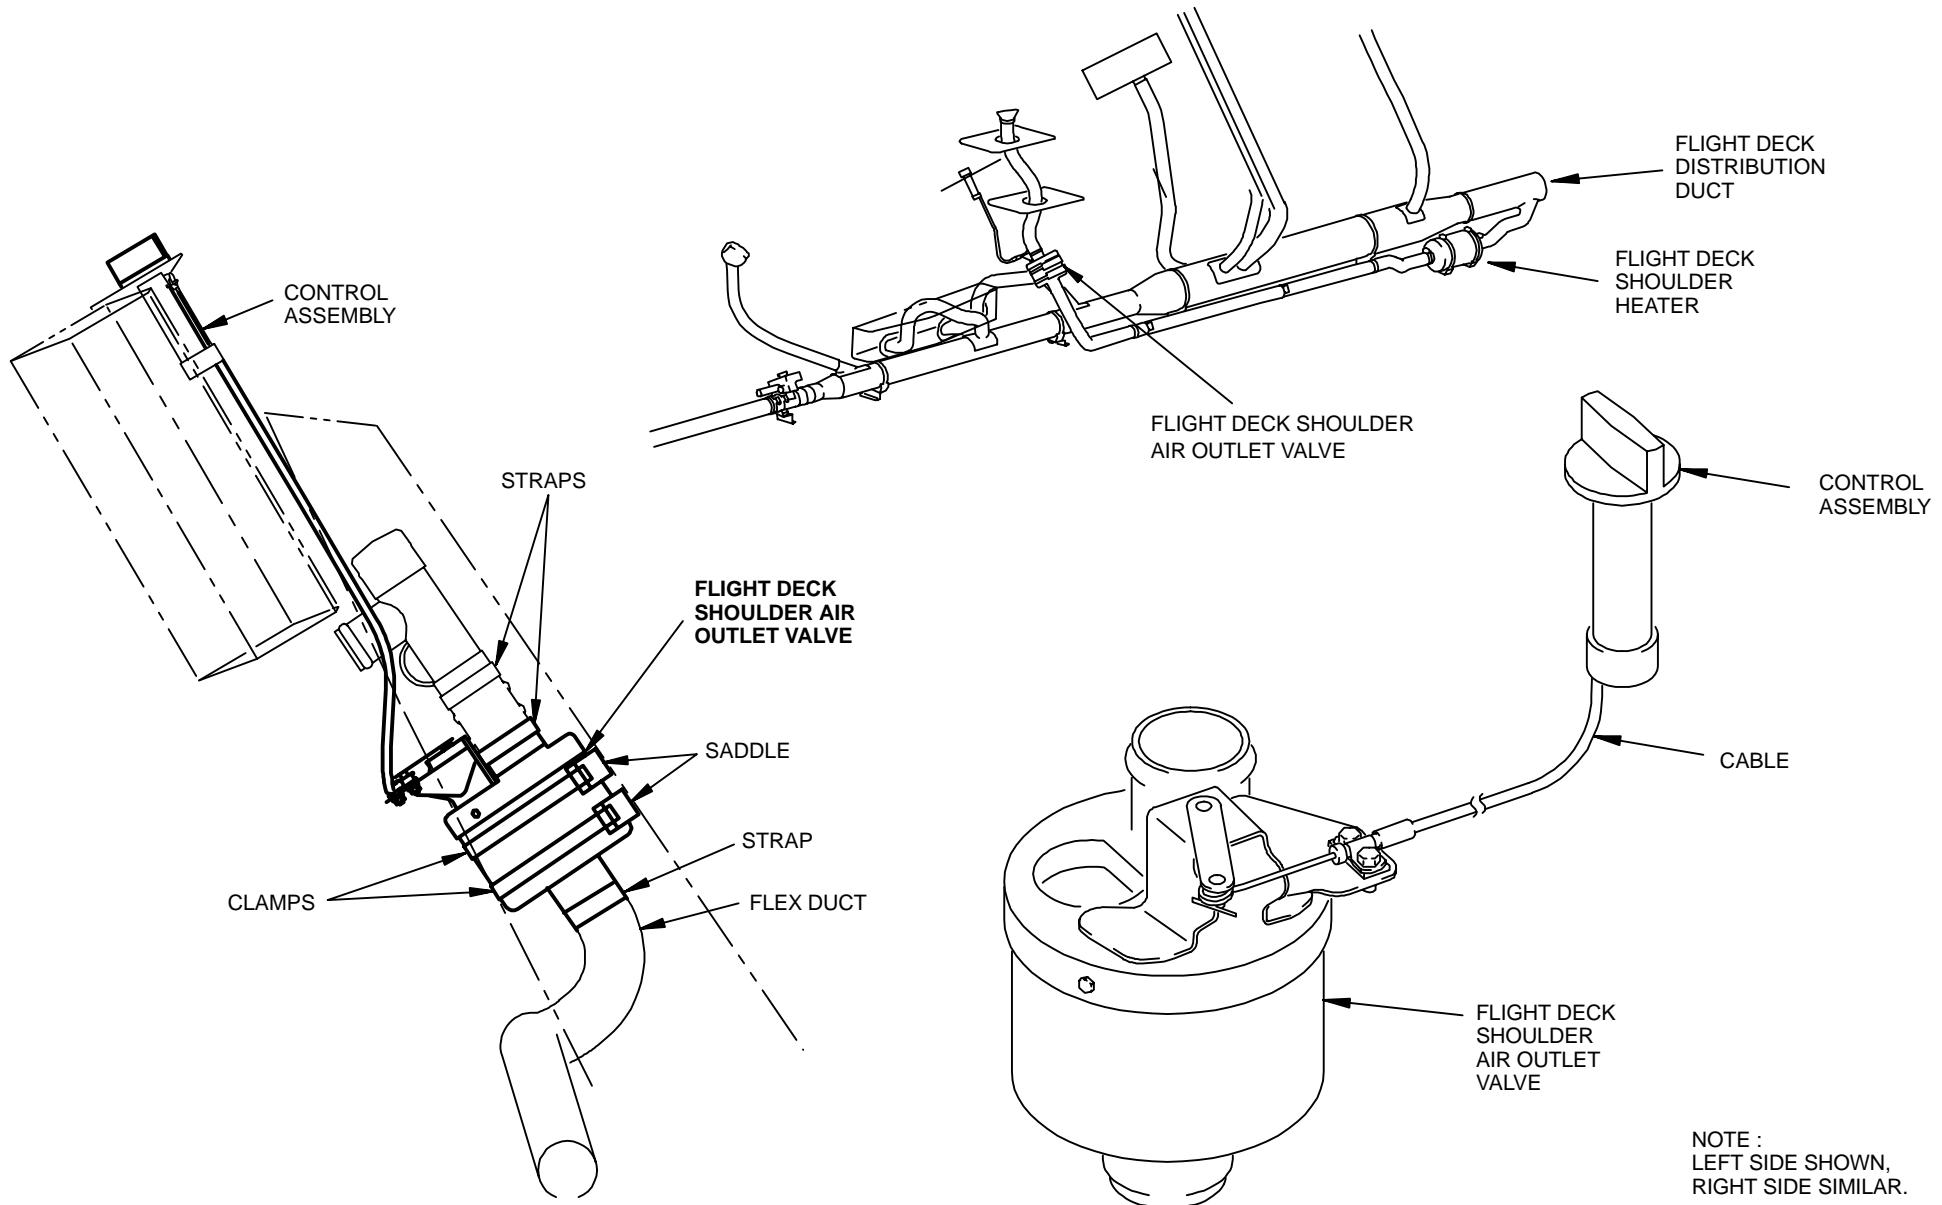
FLIGHT DECK SHOULDER AIR OUTLET VALVE
